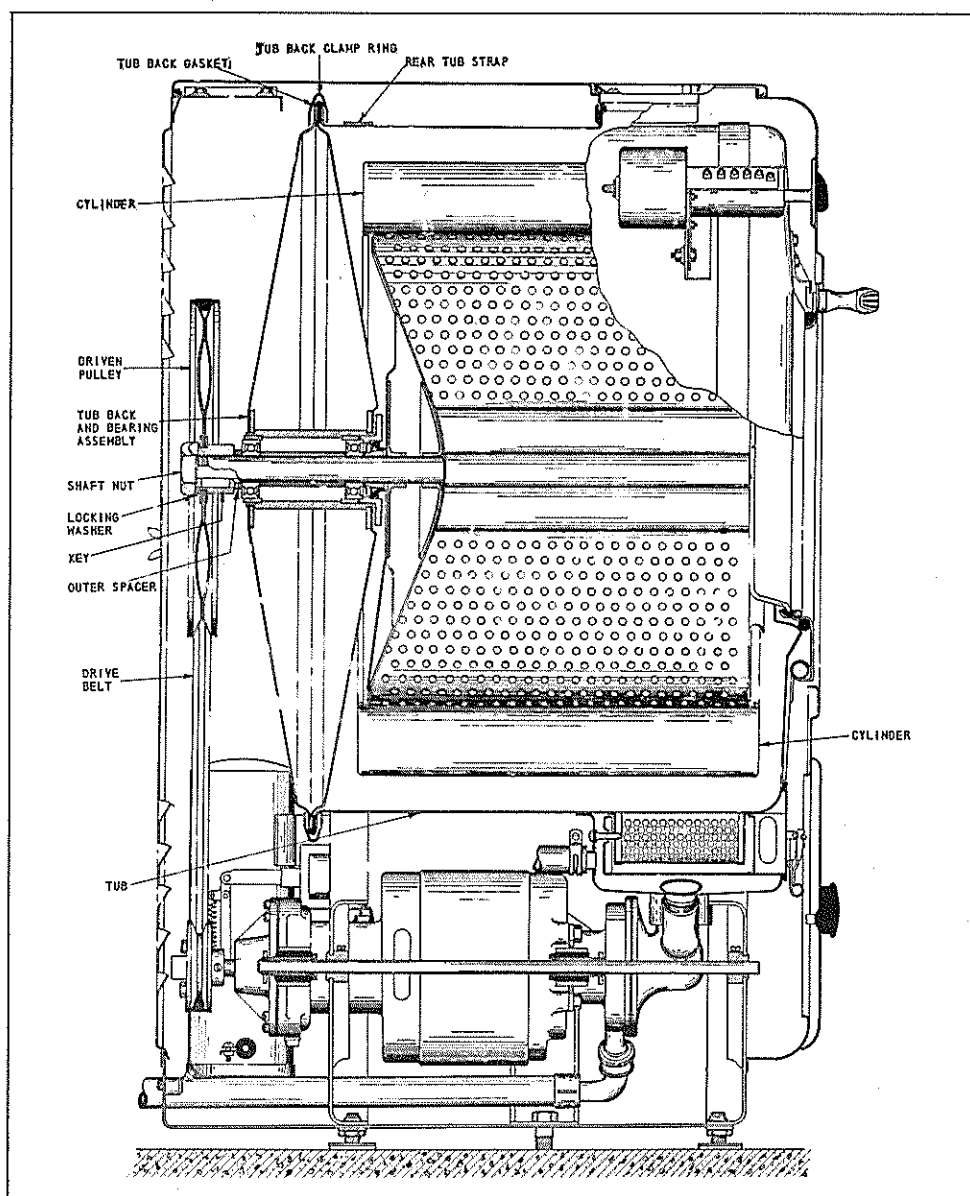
Cross Section View Showing Cylinder and Tub Back Assemblies
